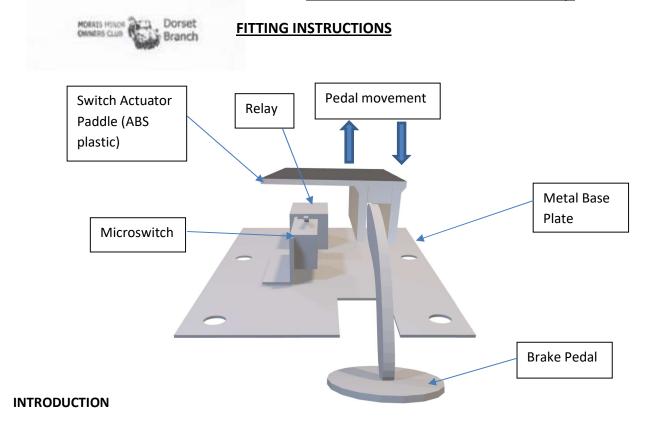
View of the Mechanical switch assembly as viewed from the inside (above)
